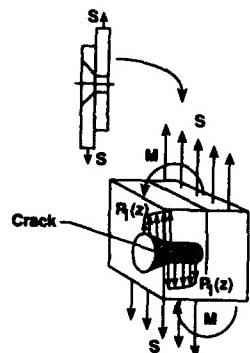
Fatigue mechanics of cracks initiating at countersunk rivets.
